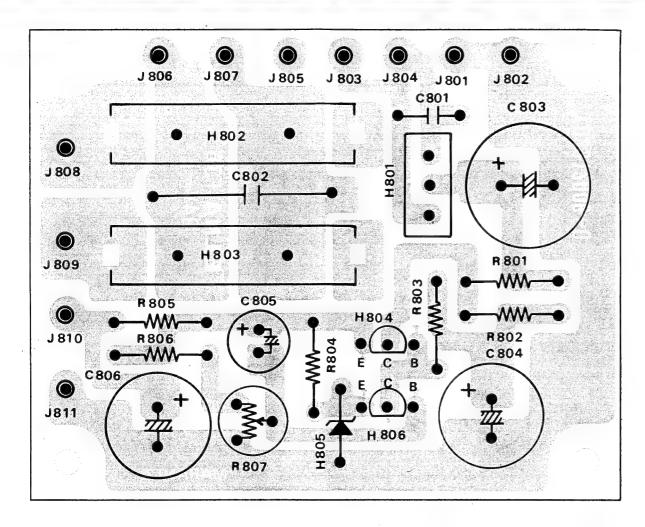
Power Supply Circuit Assembly P800 Component Locations
